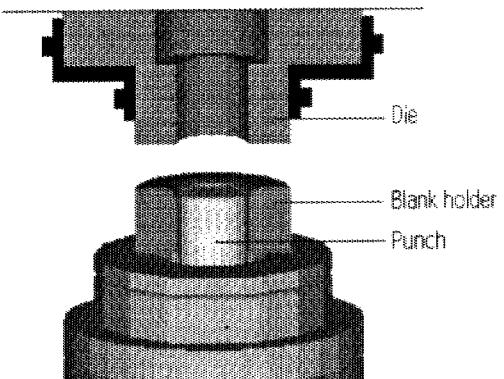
Cross-sectional view of geometric description of the tooling for deep drawing.
